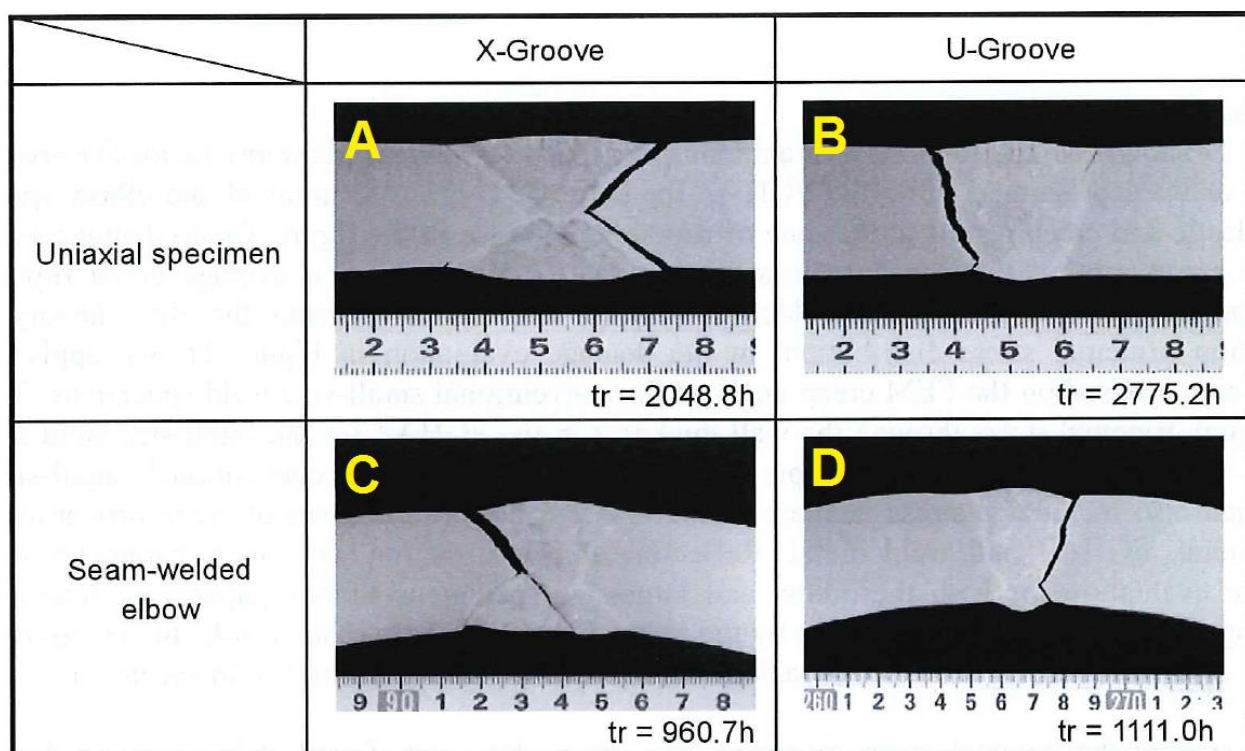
Photographs showing the cracking and fracture behavior in Grade 91 steel welds made using different weld profiles and tested as large uniaxial specimens (A and B) and as pressurized seam welded elbows (C and D) (Komai 2016)
